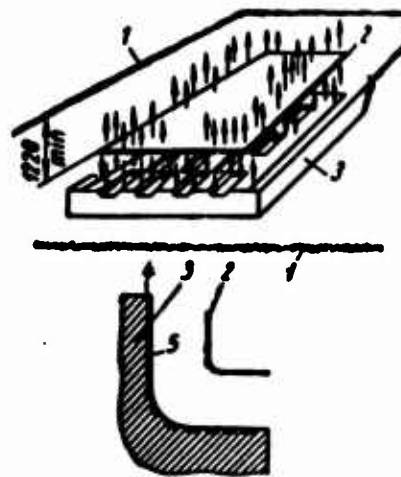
Stamping by explosion of petal EM: 1 - water level; 2 - charge; 3 - die; 4 - blank; 5 - article.
